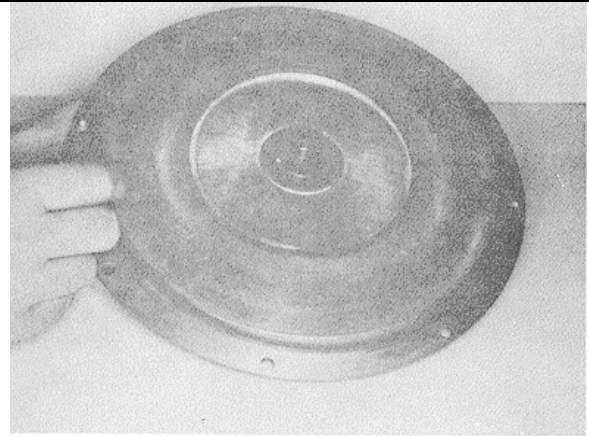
, T-538. Installing sealing ring on ST oil seal/diffuser plate
